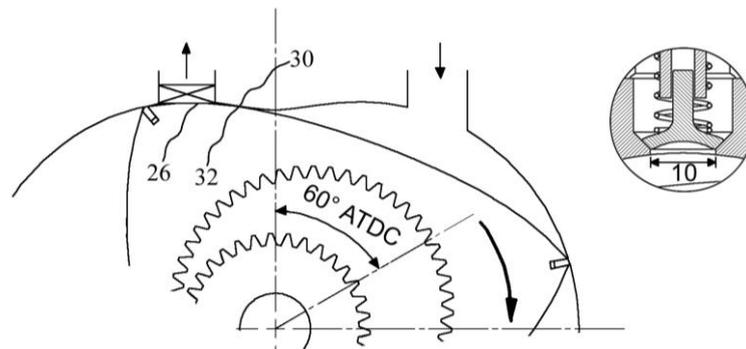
Nesting of the rotor flank with the housing bore at the end of the exhaust stroke; with an inserted view of an exit valve (three are fitted transversely)
